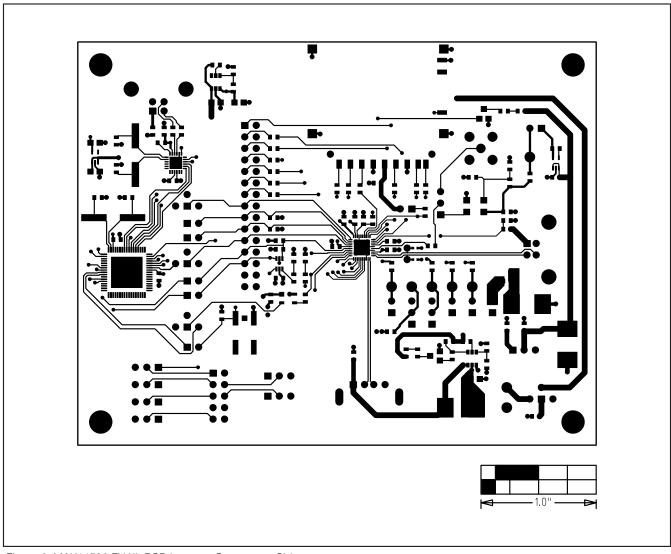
MAX14502 EV Kit PCB Layout—Component Side
